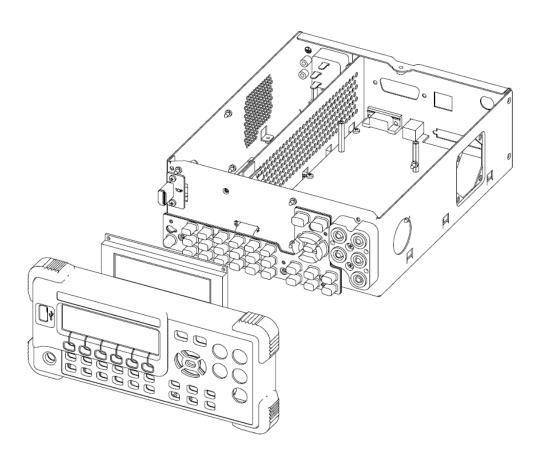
The Schematic of Disassembling and Assembling Front Panel and LCD
